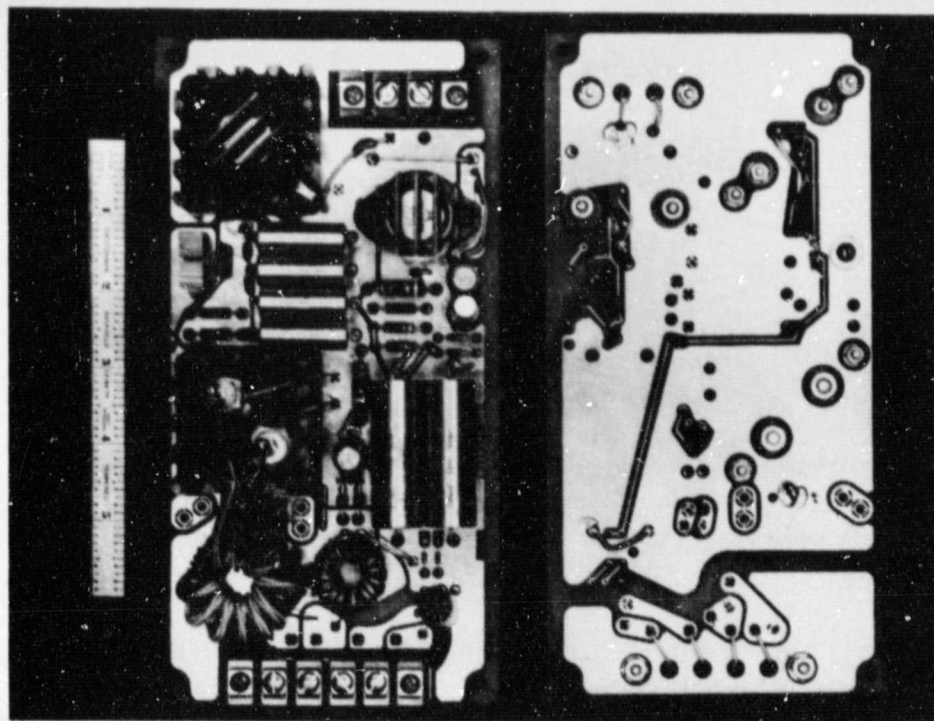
Transistor Base Drive Power Output Circuit Card Assembly
